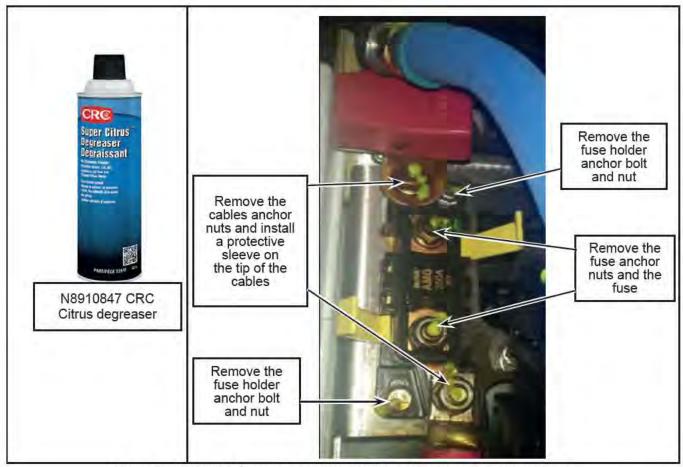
N8910847 Degreaser and Detailed View of the Fuse Holder Installation
